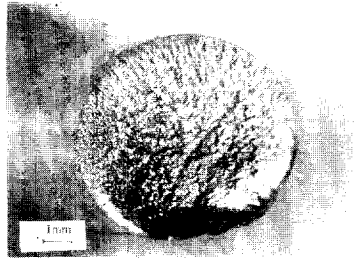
Fracture section of 10 h nitrided specimen: it is possible to see the external layer
